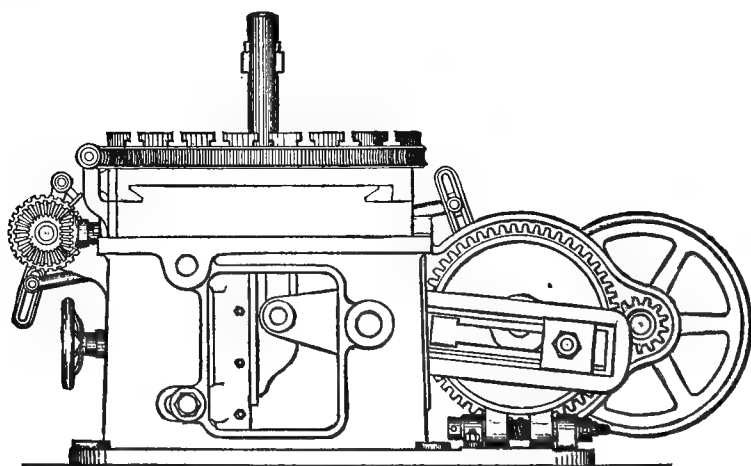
Key-seat slotting machine; Fétu-Defize & Co., Belgium.
